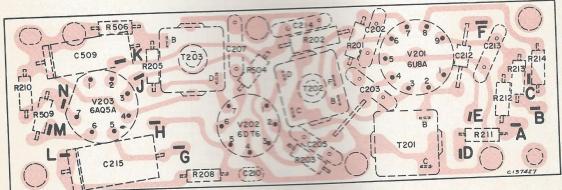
PW 200 Printed Wiring Stand & Noise Inverter Assembly
